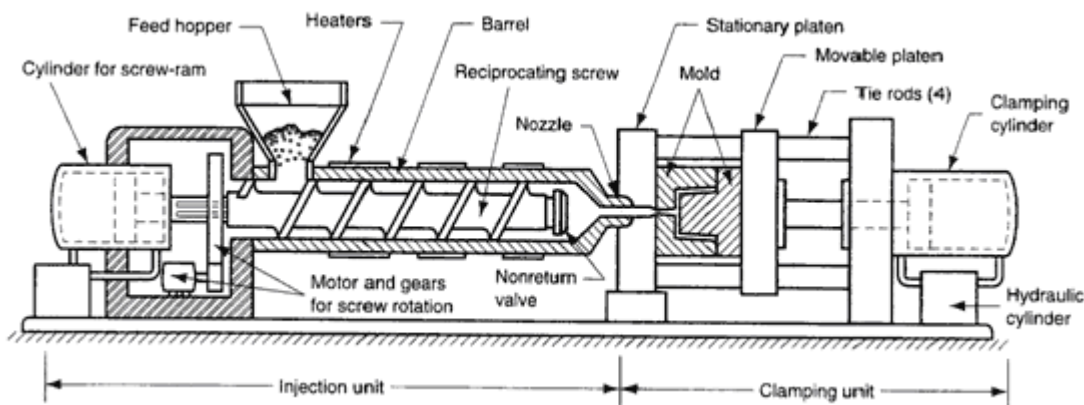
Horizontal injection moulding machine layout diagram (ELITE, 2010)
